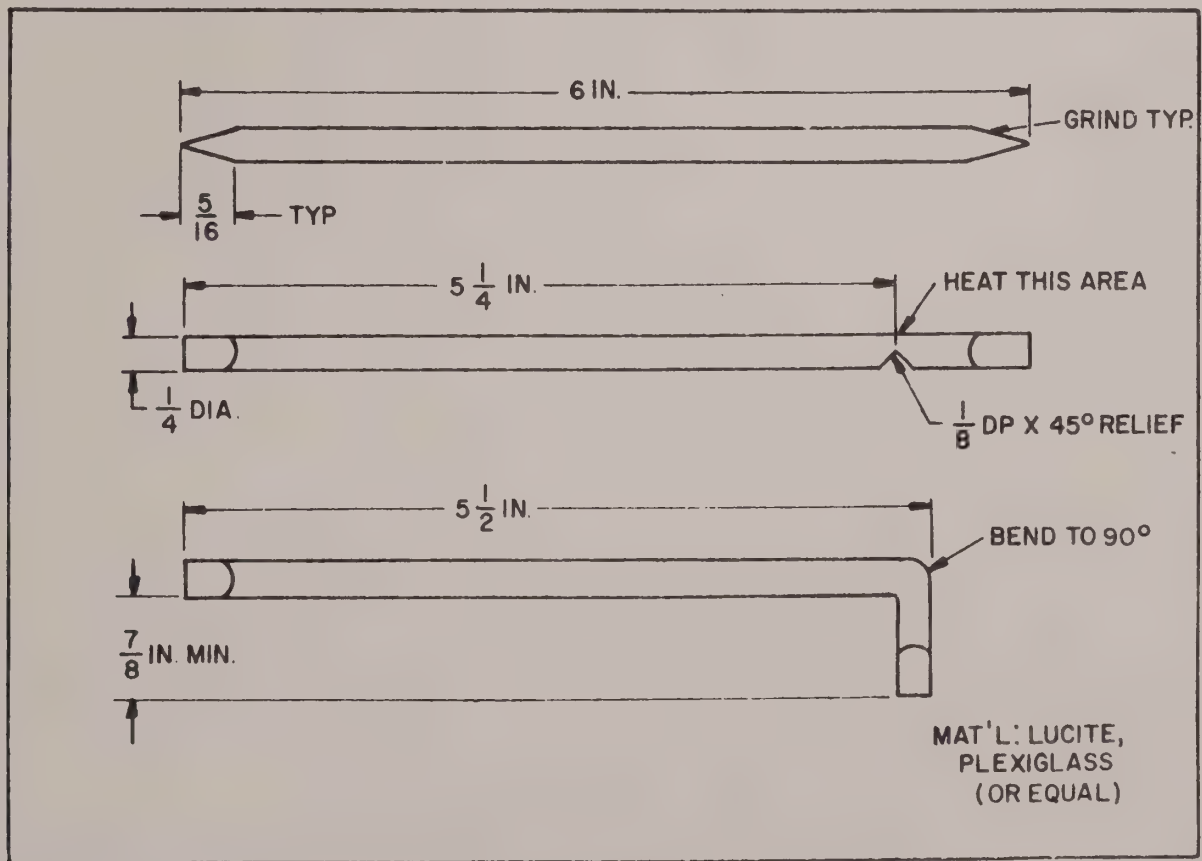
Right Angle Insulated Screwdriver Fabrication Details.
